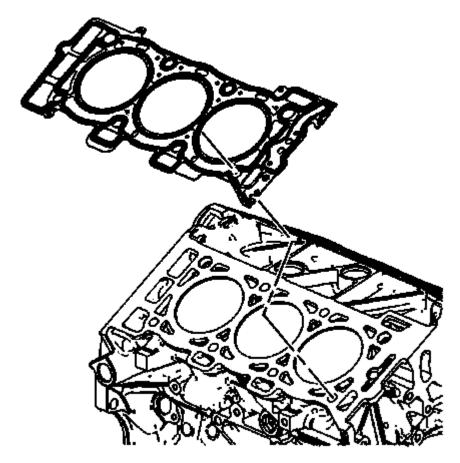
View Of Right Cylinder Head Gasket Courtesy of GENERAL MOTORS COMPANY
